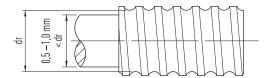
Special requirement of bearing journal with internal recirculation system
